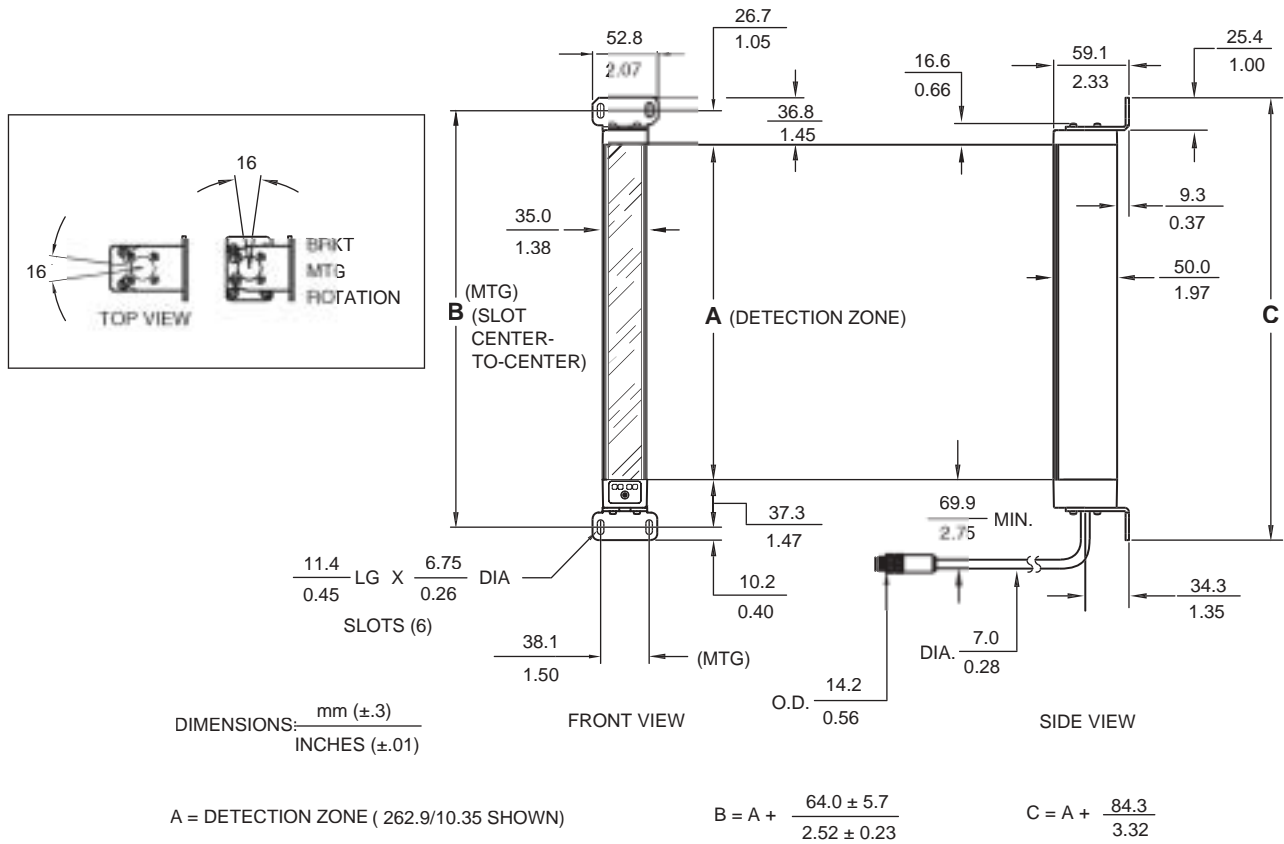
Dimensions (See Table 18 for Dimensions A, B, and C)
